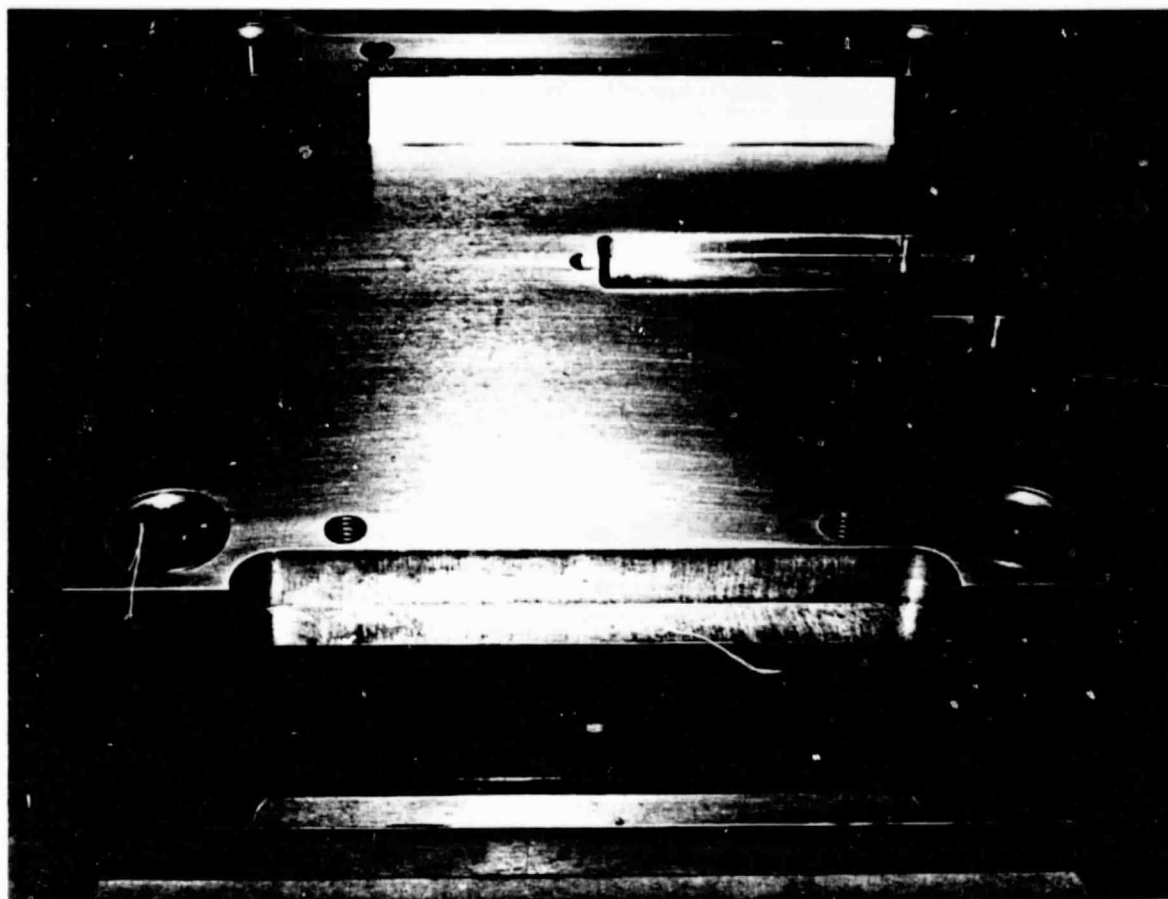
Tool for Injection Molding Physical Property Sample Billets
